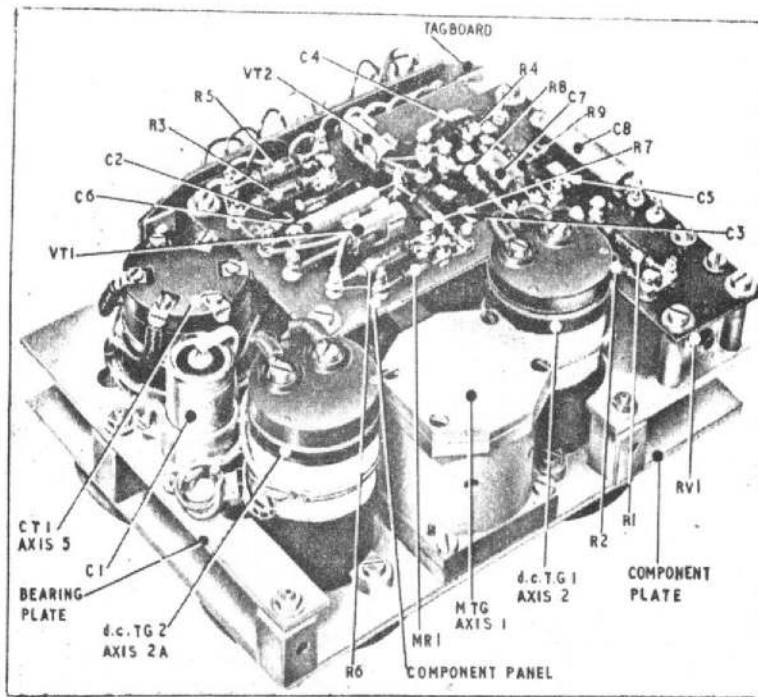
Rate of climb gearbox assembly (G2)—view A
